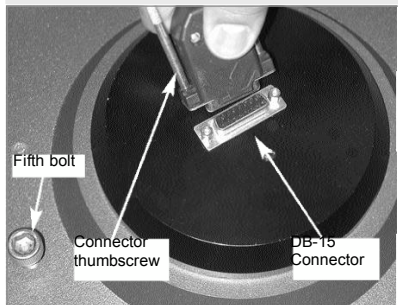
View beneath plate (fork base not shown for clarity sake): Thread-in the fifth bolt and attach the DB-15 connector underneath the plate.
